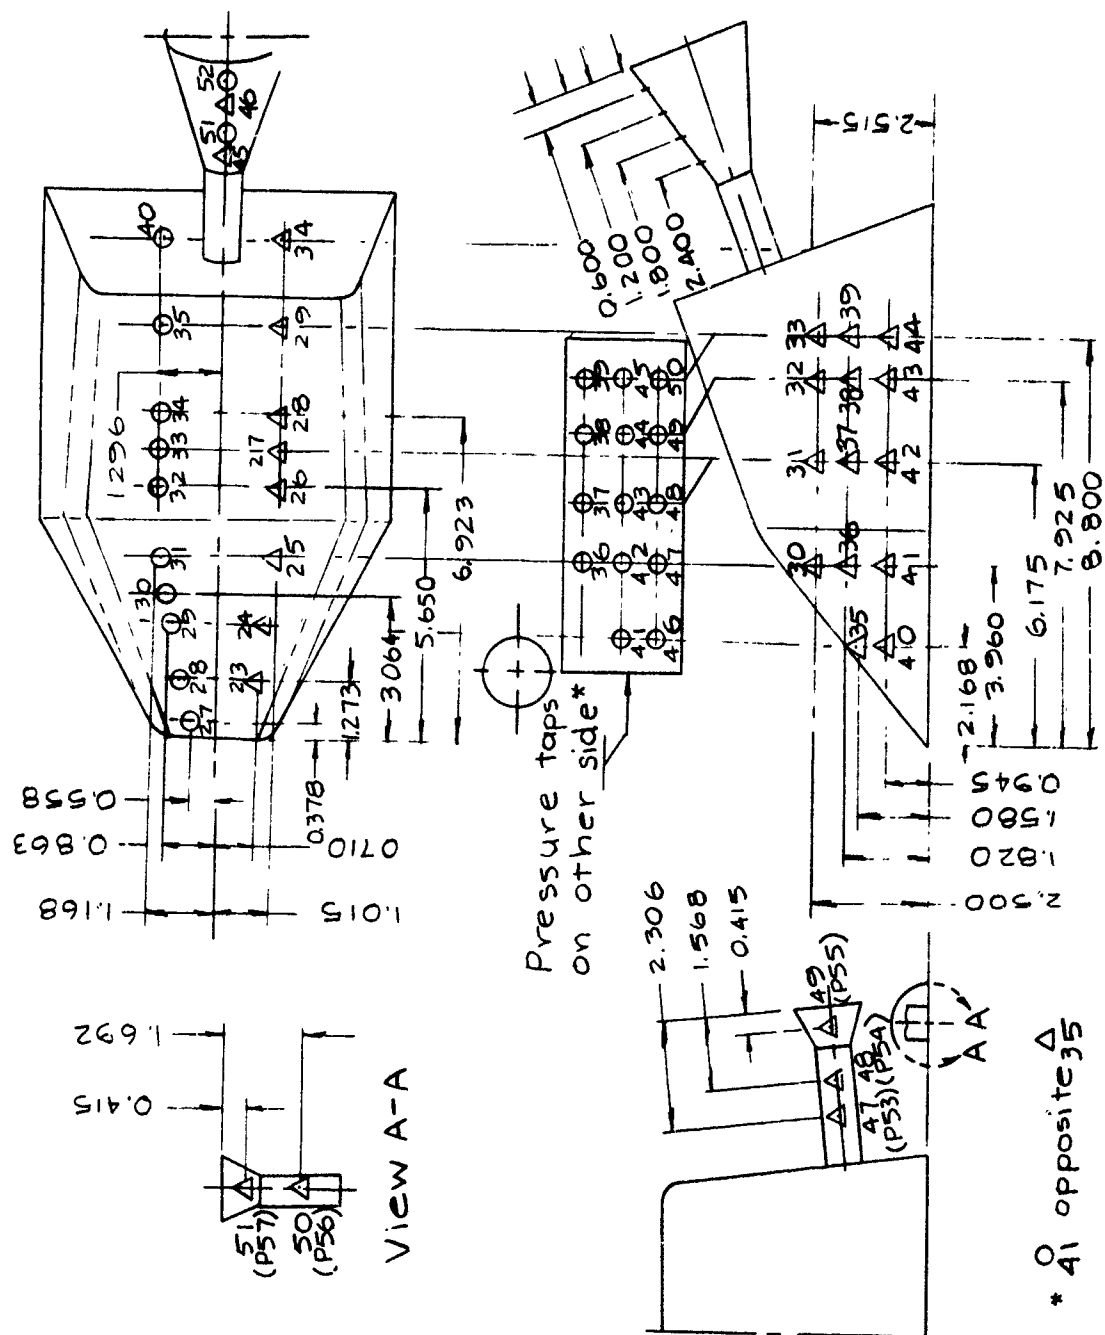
Thruster Assembly Model Instrumentation Locations
